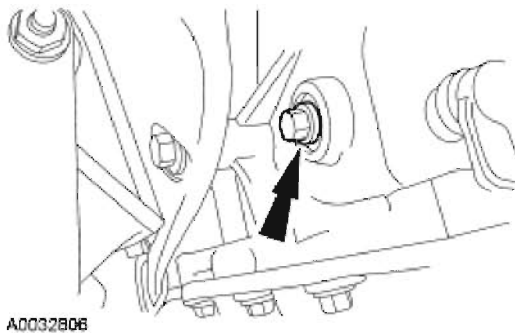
Locating Upper Front Cover Timing Hole Plug
